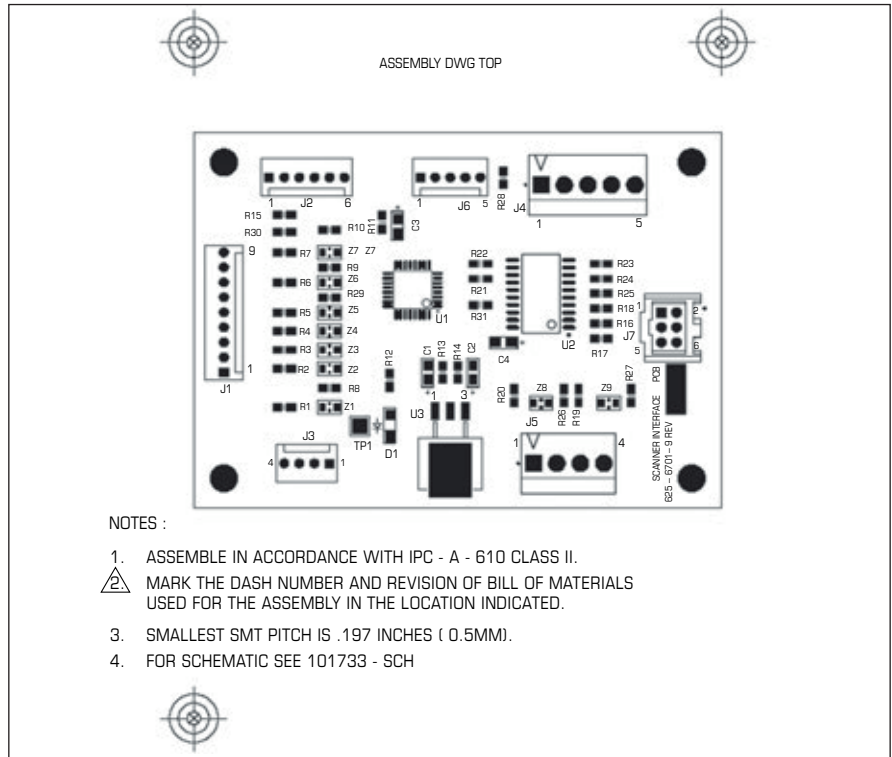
Example of a properly created assembly drawing. It can eliminate confusion, answer questions, and reduce board defects.
